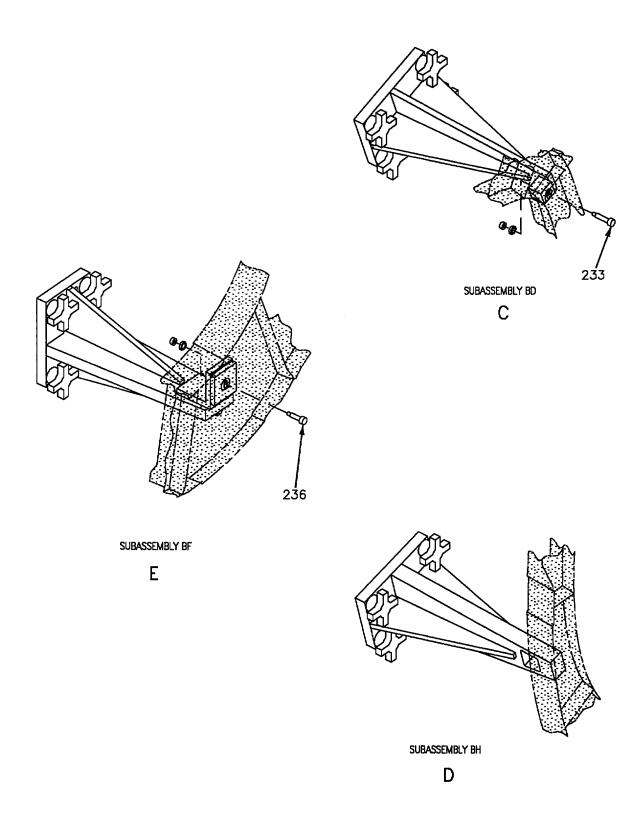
Installing Inlet in Maintenance Fixture (Sheet 4)
